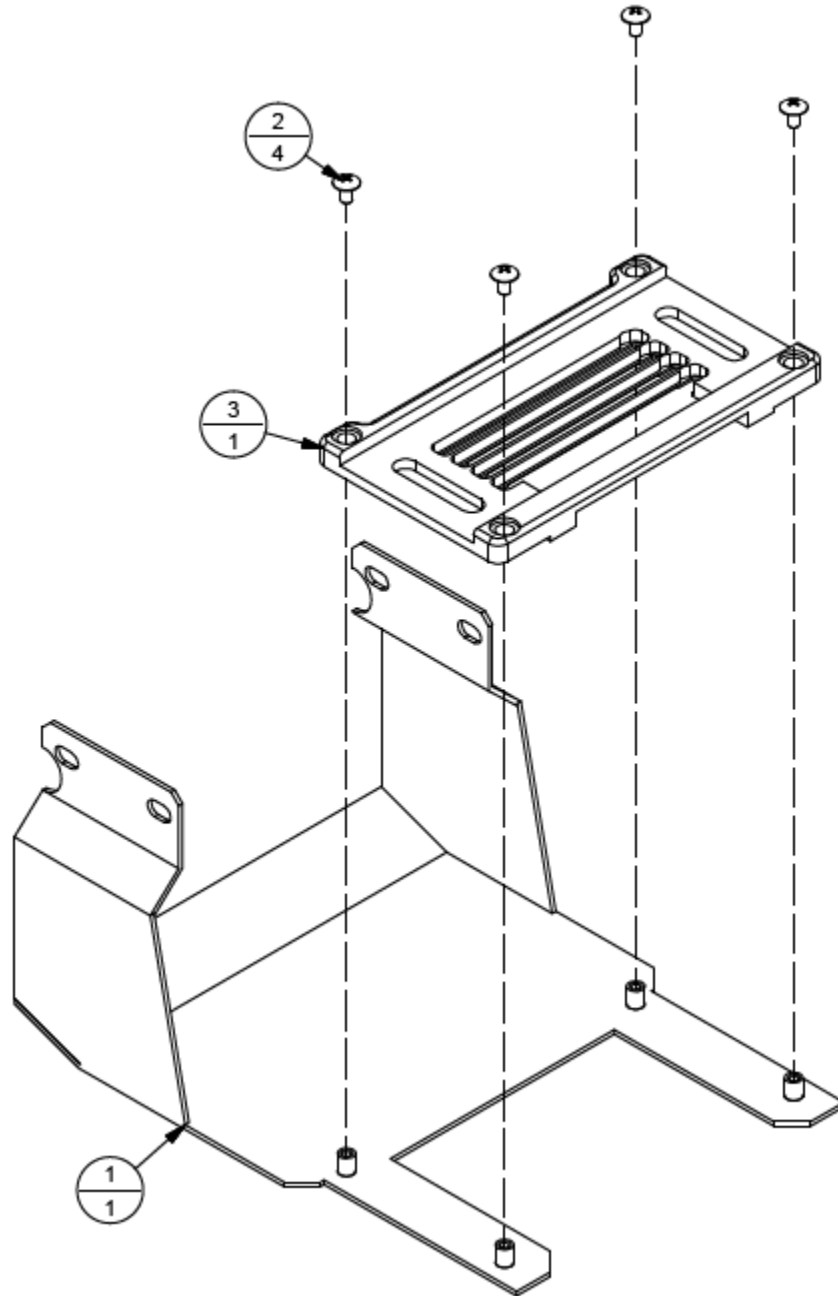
9105072A – Shield Assembly, Atom 2500, BK230
